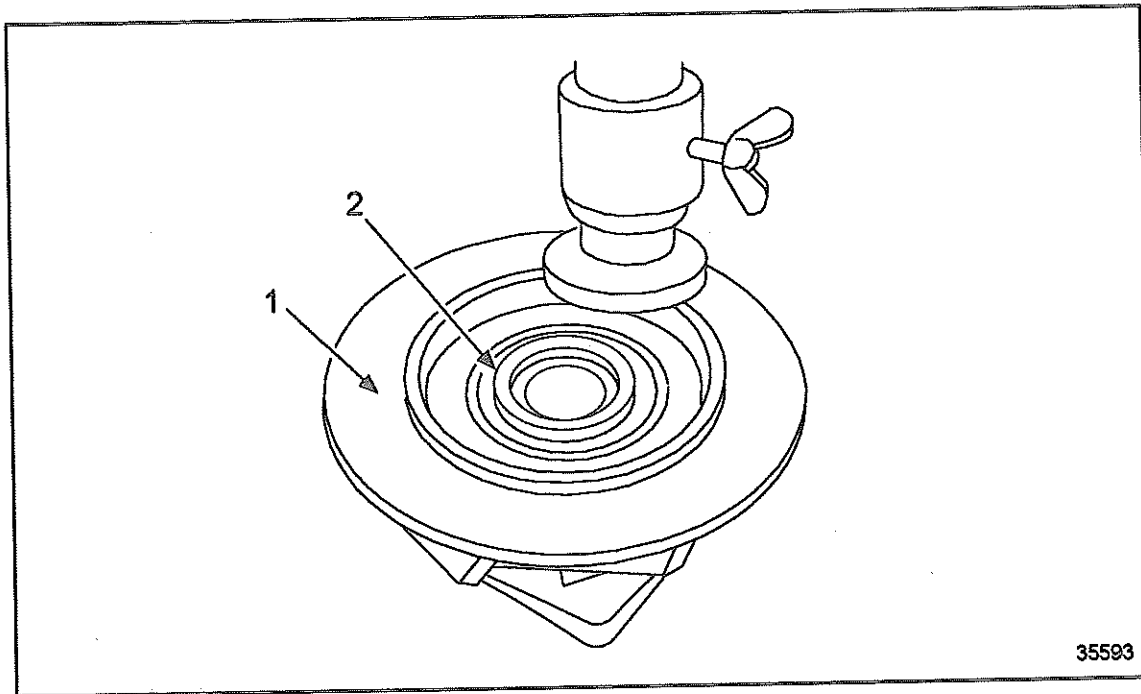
Installing Impeller and Cleaning Rotary Seal Surface
